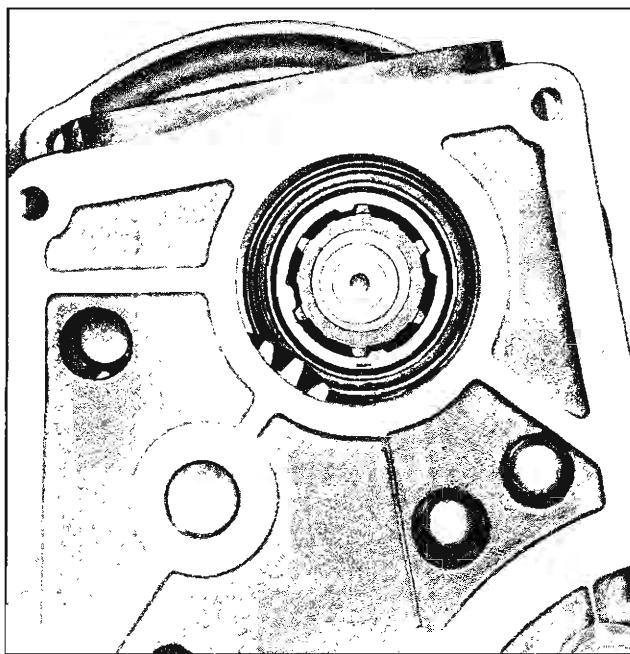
Synchronizer Tangs Aligned with Mainshaft Splines
